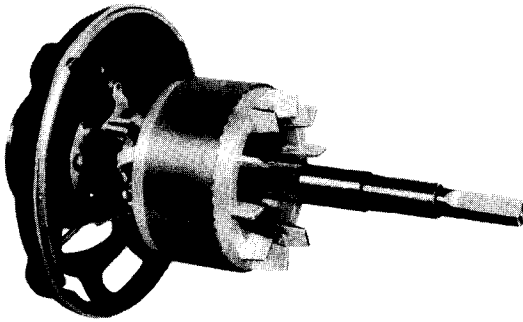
A complete rotor of a split-phase motor. (*Wagner Electric Co.*)
